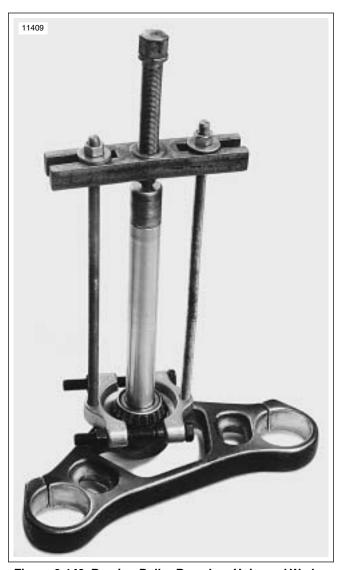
Bearing Puller Based on Universal Wedge Attachment (typical) (VRSCA shown)
